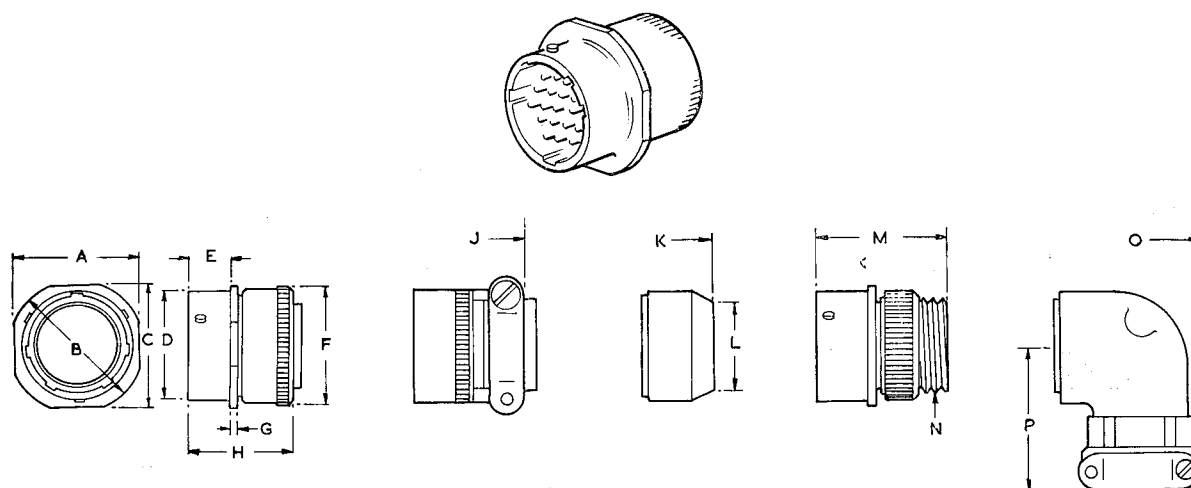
Large flange wall mounting receptacle for back panel mounting, Type 8 (MS3128)
